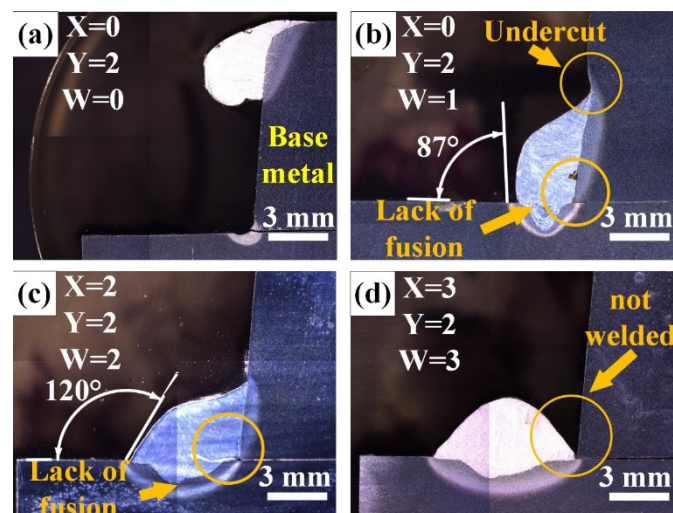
Macroscopic morphology of the weld with traditional distribution ($X = 0$, $Y = 2$ mm).
